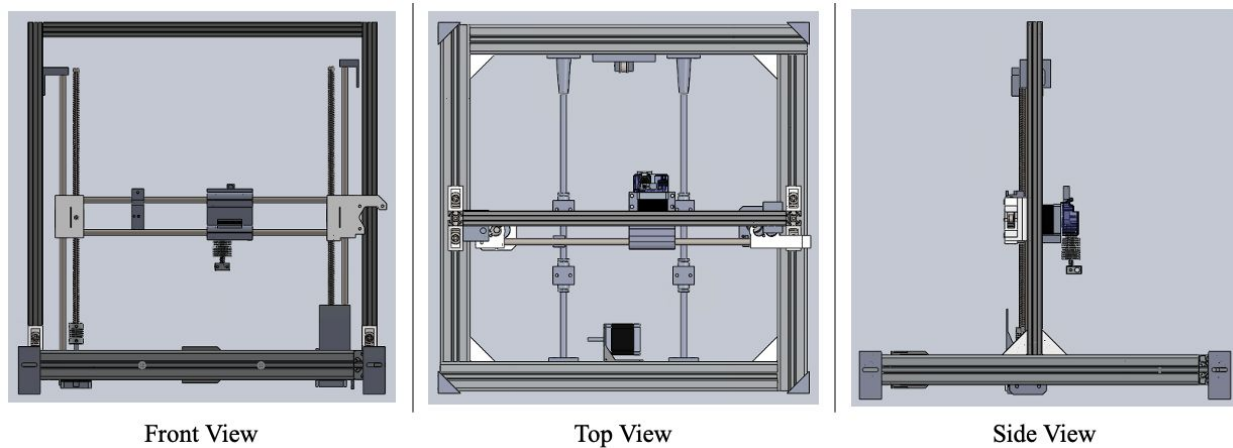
Varying Views of 3D Printer SolidWorks Assembly
